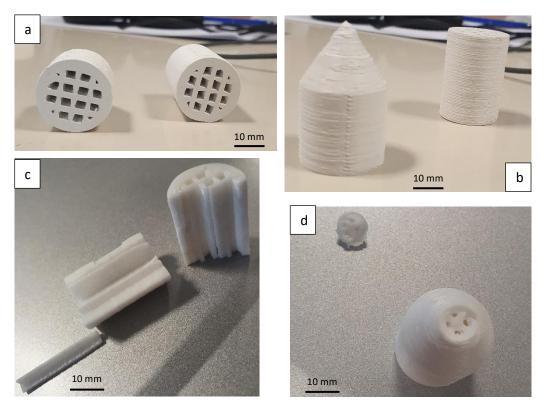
a) b) cone and cylinder before sintering; c) cylinder after sintering; d) cone after sintering
